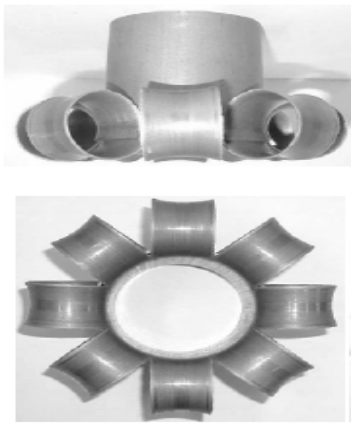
Typical mild steel specimens after tests (Huang et al.⁽¹⁾)
